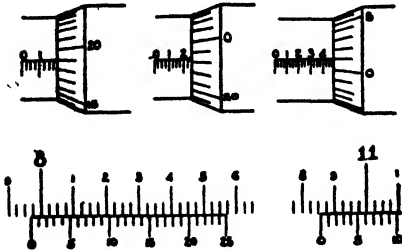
Micrometer and Vernier Caliper Settings.
